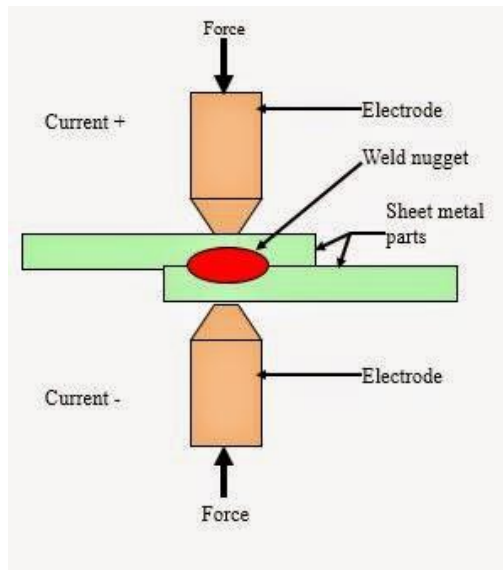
Parts Involved in Resistance Spot Welding, (Mechanical Inventions)
